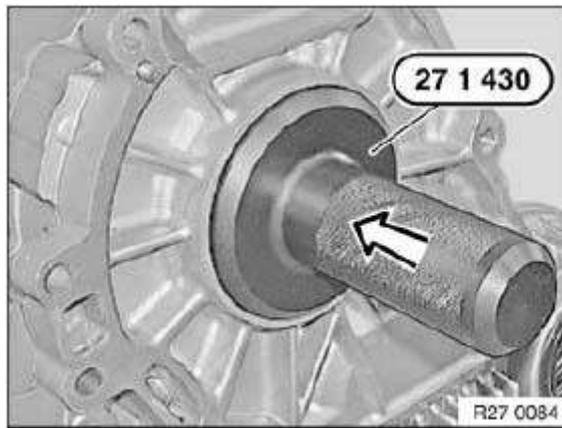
Installing Radial Shaft Seal With Special Tool (27 1 430)
